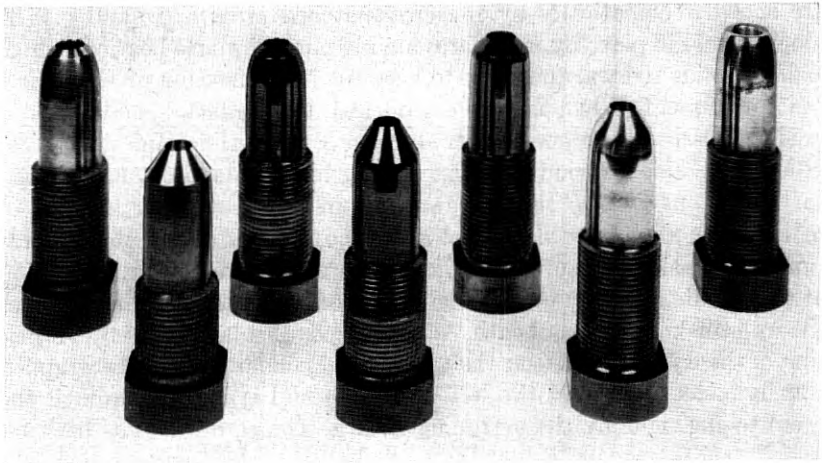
Some experimental dies and core-tubes. The three middle tools have baked on oil finish.
